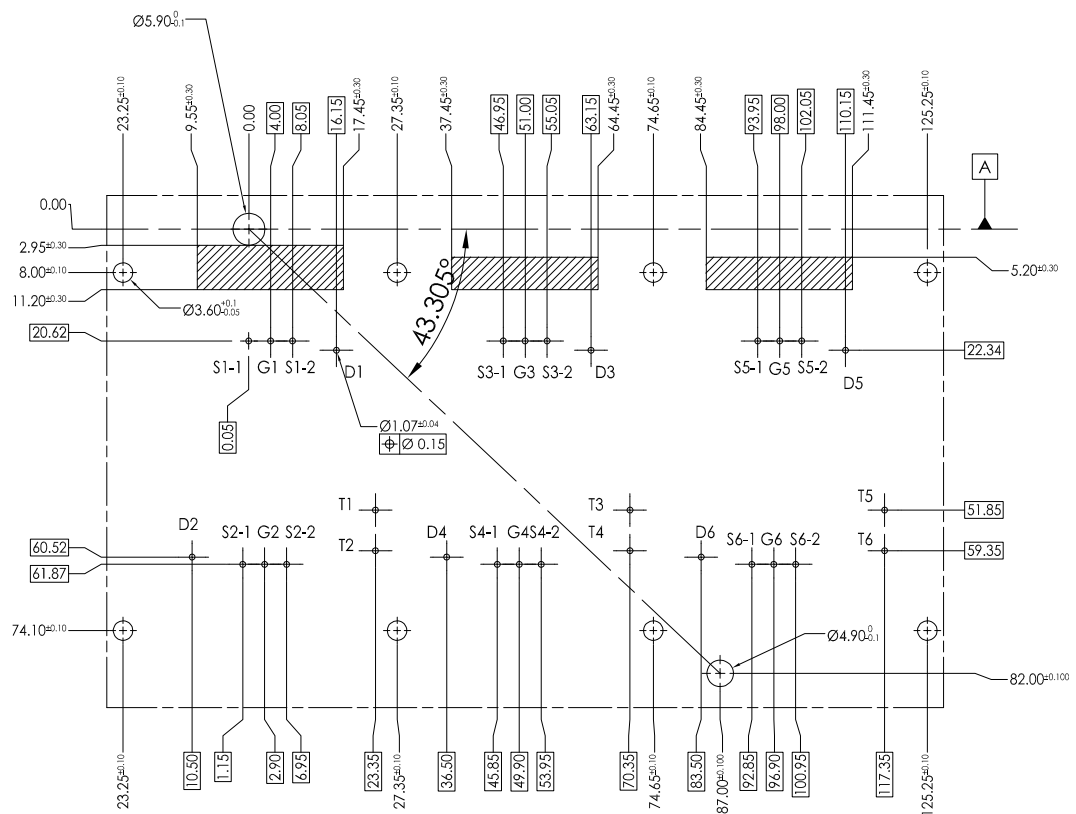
ACEPACK DRIVE PCB drawing (dimensions are in mm.)
